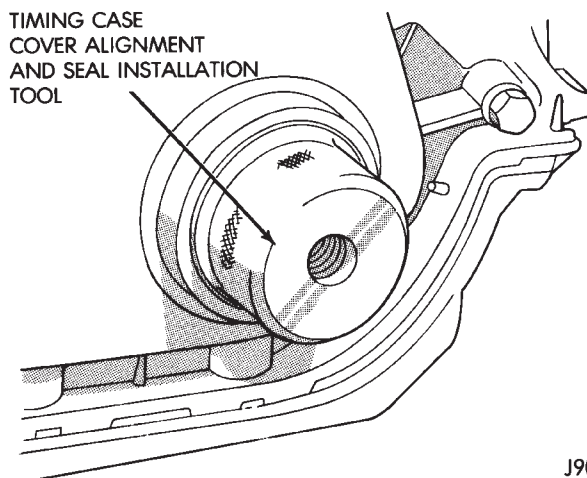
Timing Case Cover Alignment and Seal Installation Tool 6139
